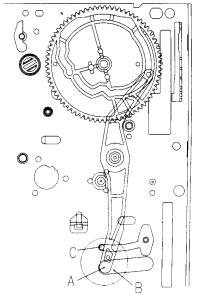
ASSEMBLY OF THE CAM GEAR & RELAY LEVER
